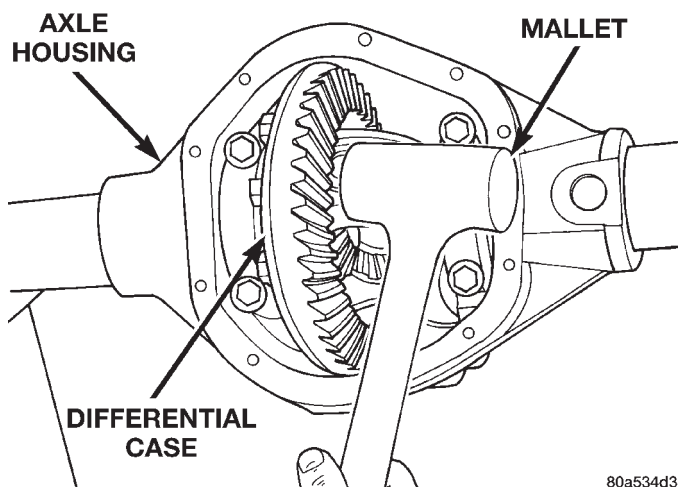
Seat Ring Gear Side Differential Dummy Side Bearing
